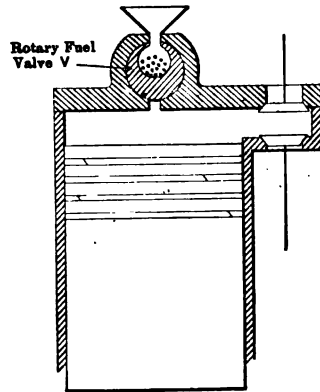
Fuel feeding arrangement, Dr. Diesel's original patent.
